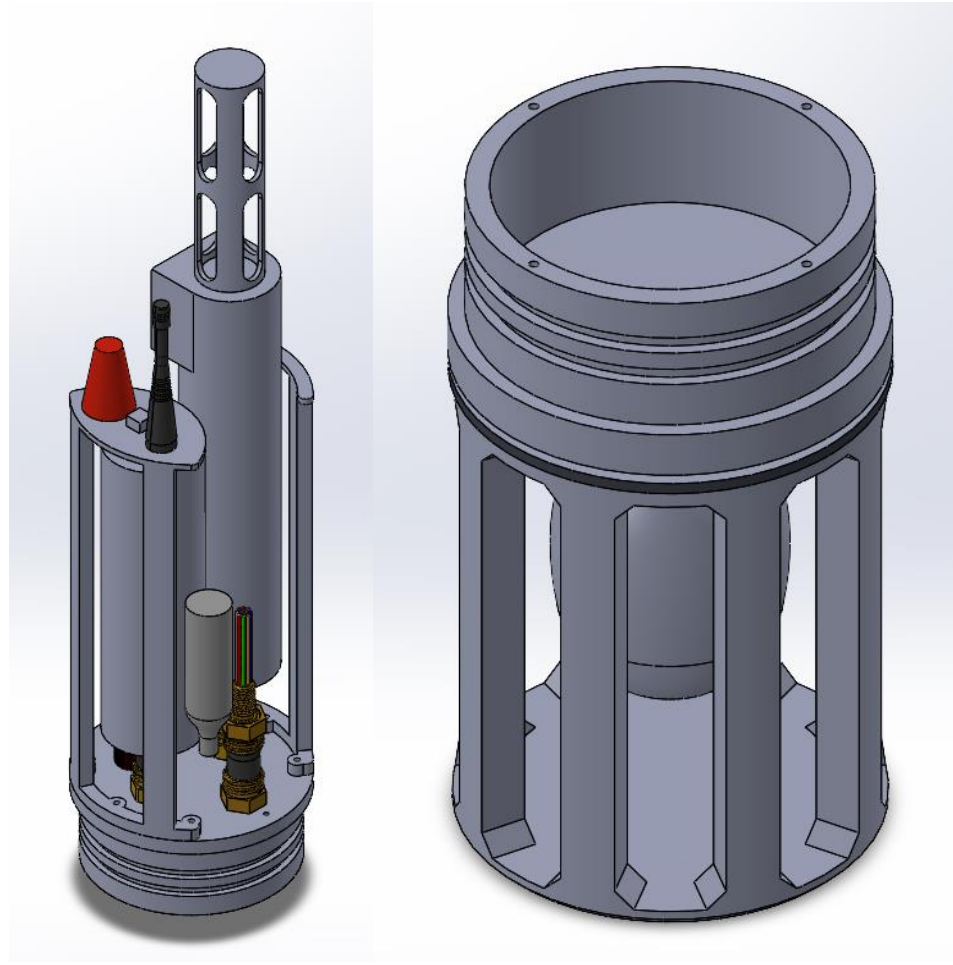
/b. Top cap assembly / Bottom cap assembly.
